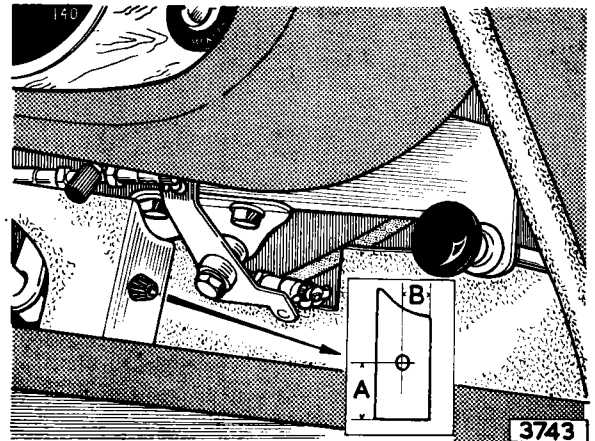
Drilling the front parcel tray for balance control mounting
